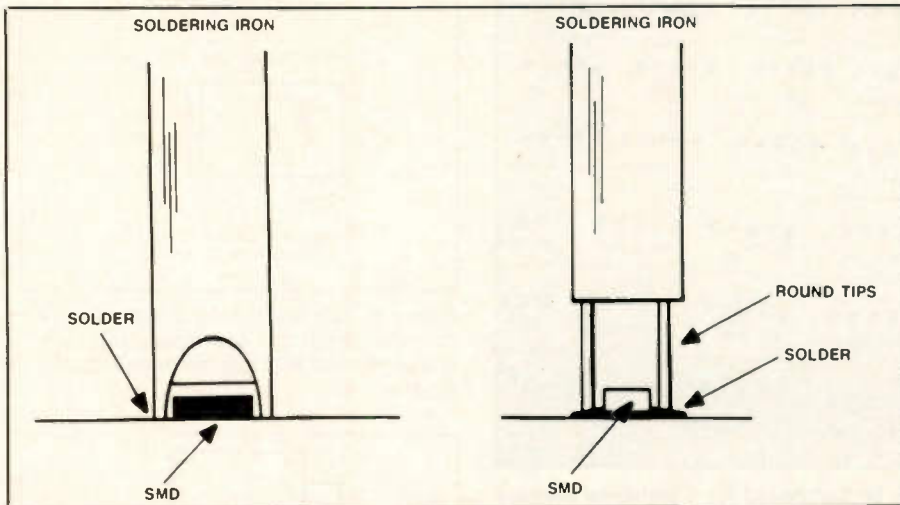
Special soldering and temperature controlled equipment is needed to easily remove and replace SMD components. Special soldering tips are used to straddle the SMD part.
